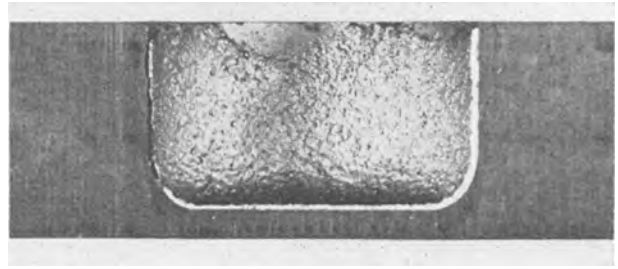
Cross-sectional view of molded $\frac{3}{4}$ in. diameter cavity coated with solder spray.
